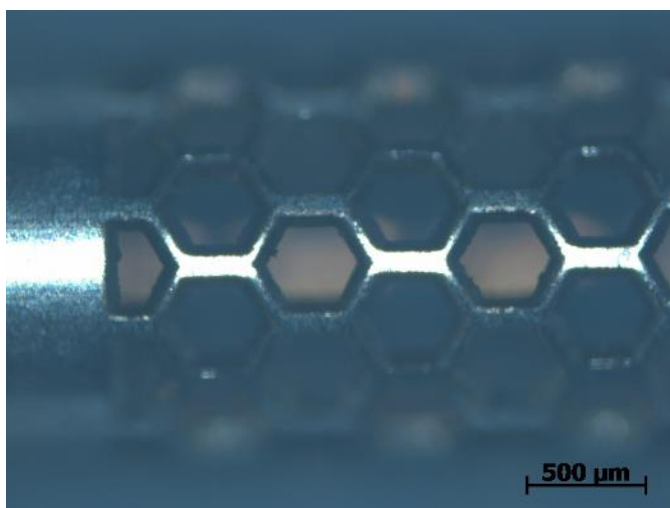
Honeycomb pattern machined on a stainless steel tube AISI 304 by means of a synchronized galvanometric scanner and rotary axis
